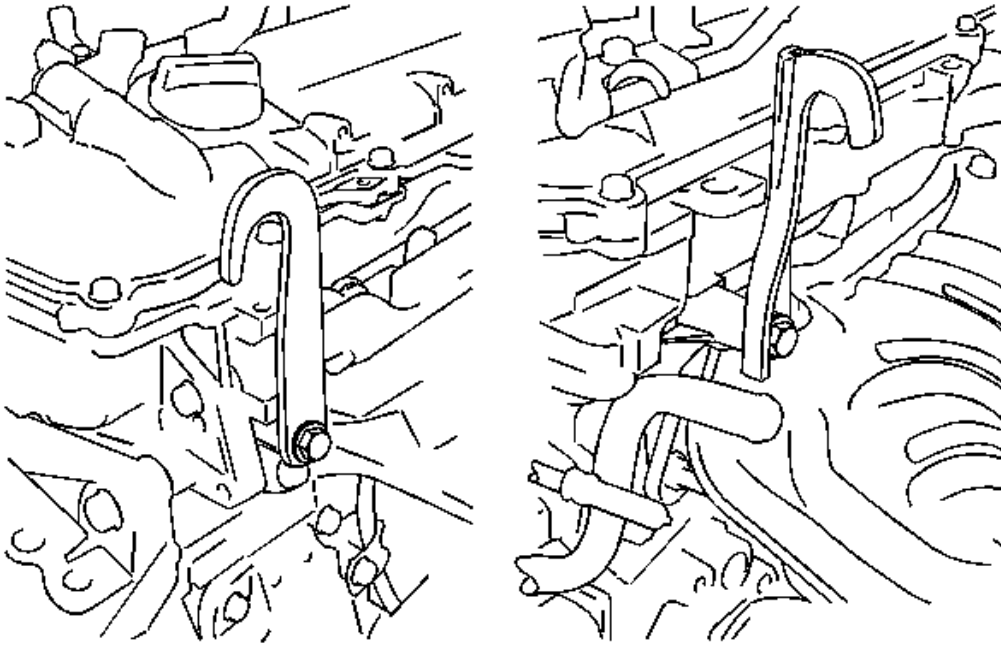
View Of Installing Engine Hanger With 2 Bolts
